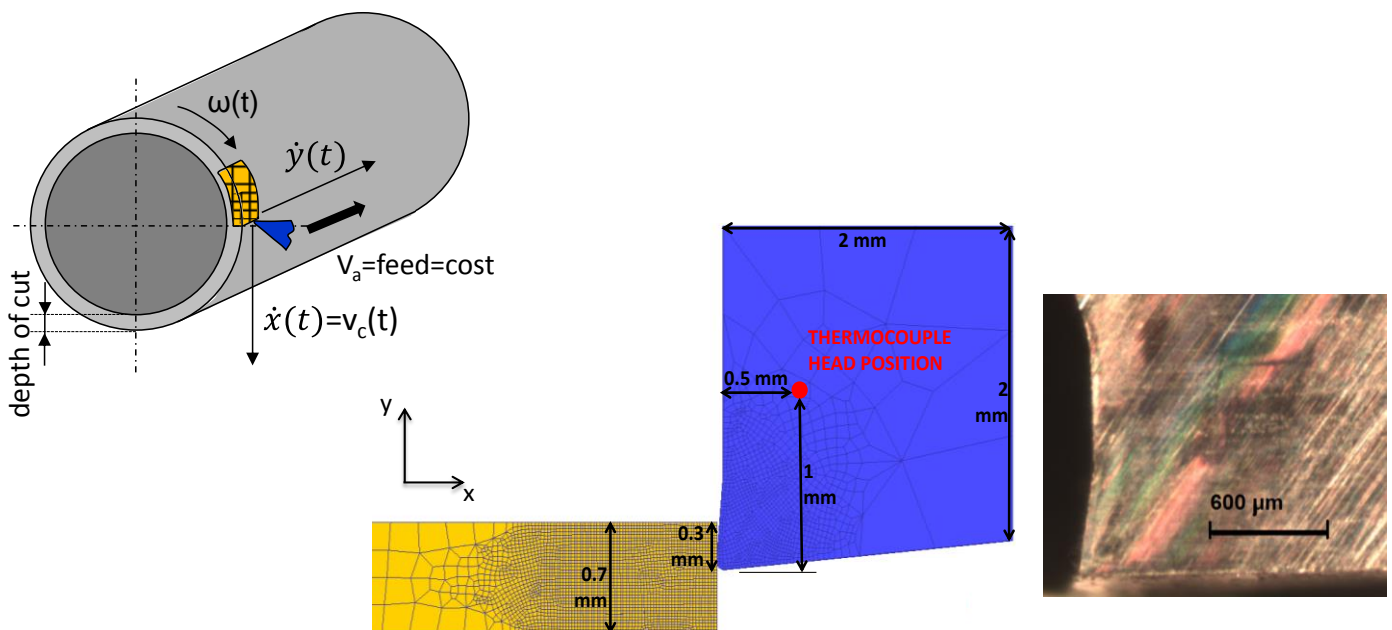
Tool and Workpiece modelling and detail of tool micrograph
